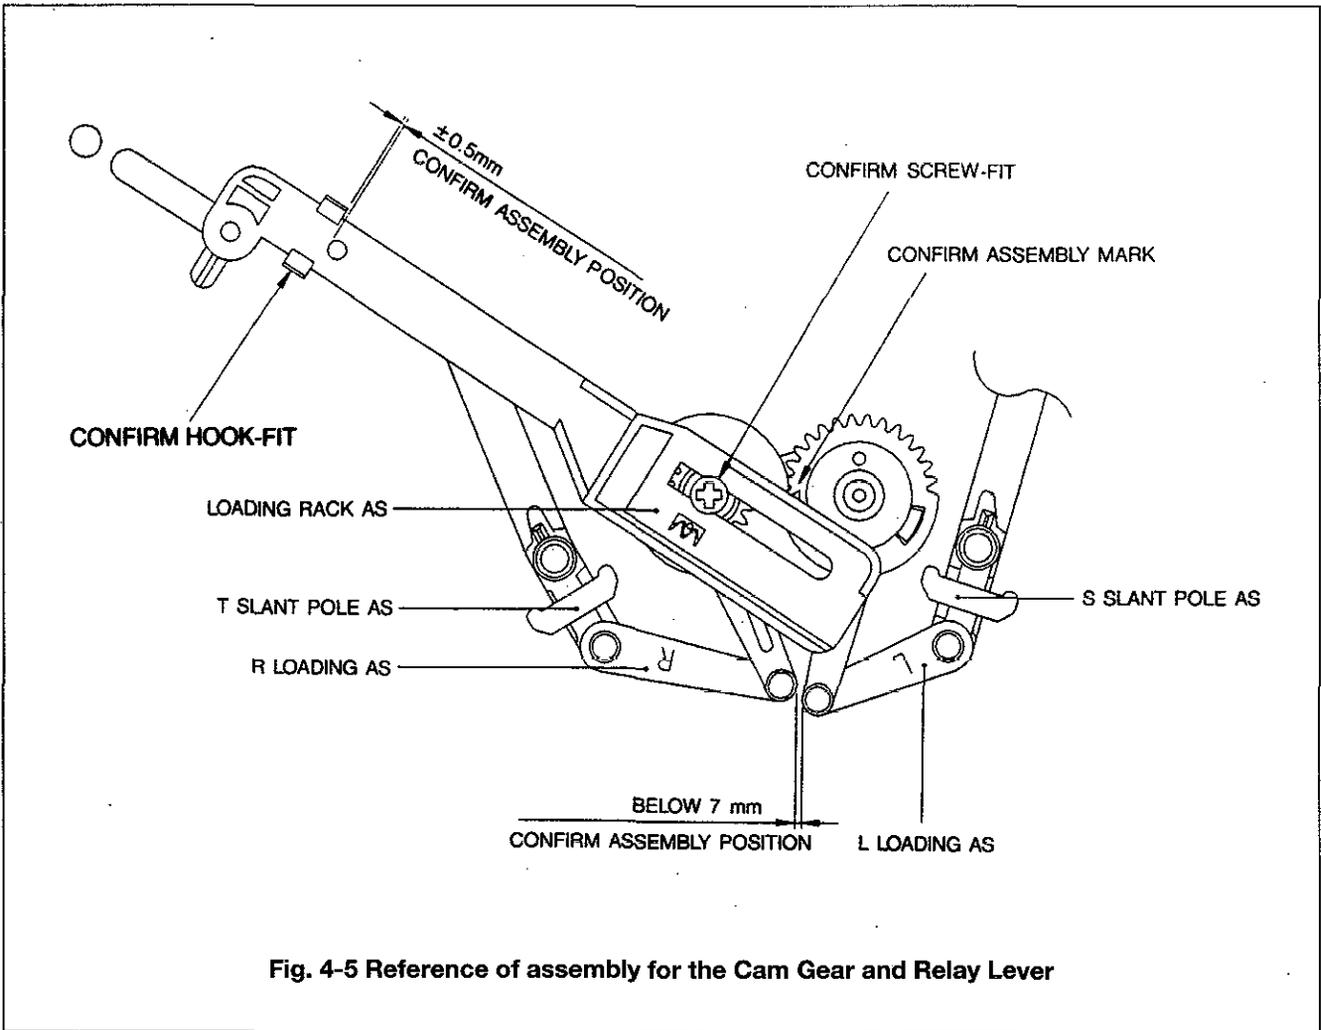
Reference of assembly for the Cam Gear and Relay Lever
